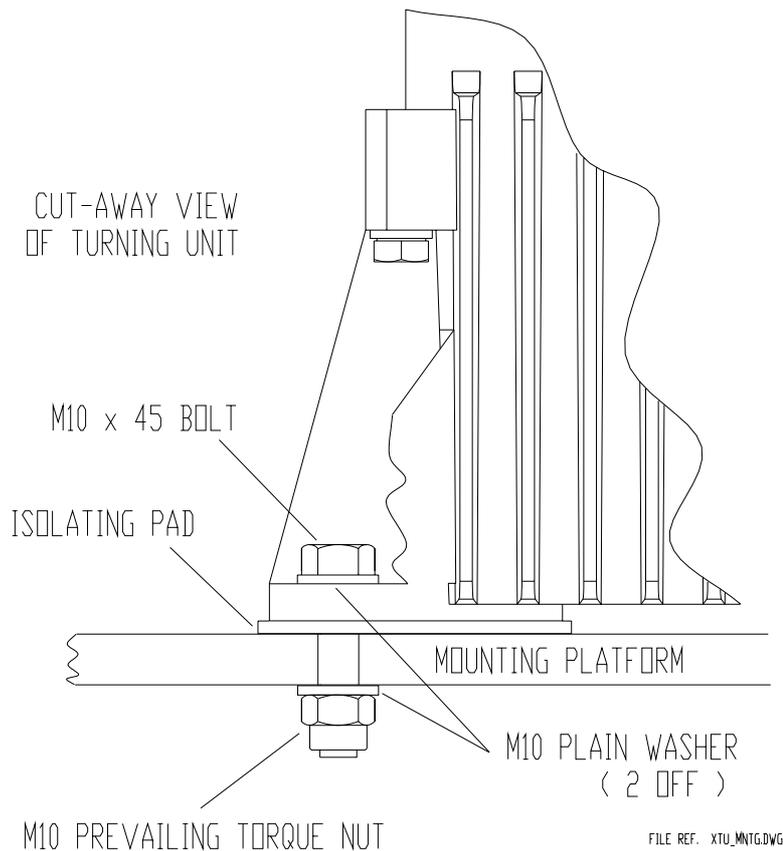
Fixing the Turning Unit to the Mounting Platform
